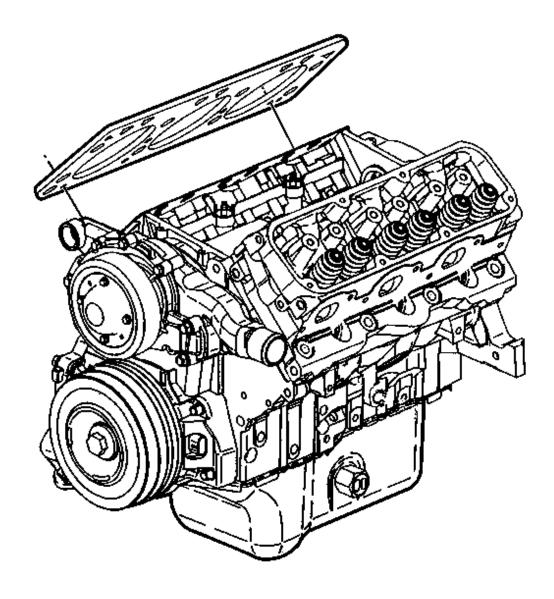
Right Cylinder Head Gasket Courtesy of GENERAL MOTORS CORP.
